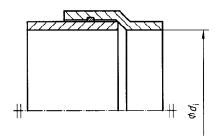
Push-in joint with seal (seal type to be selected by manufacturer)
